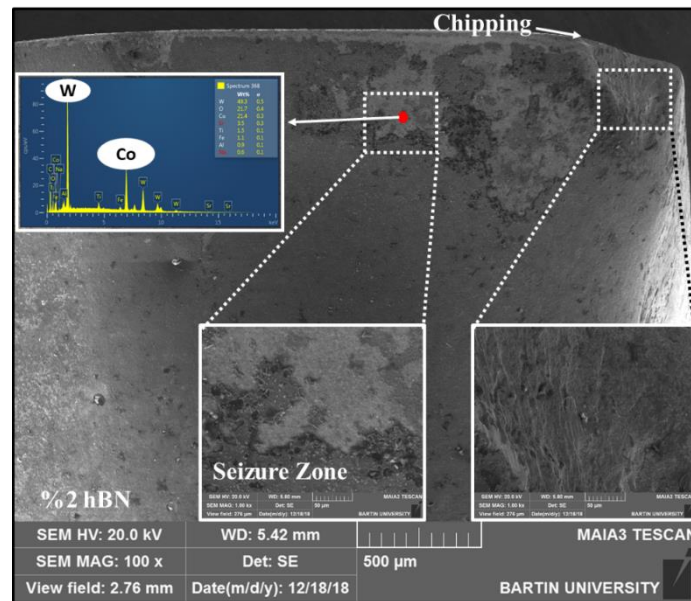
SEM image of worn cutting tool using %2 h-BN added cutting fluid
